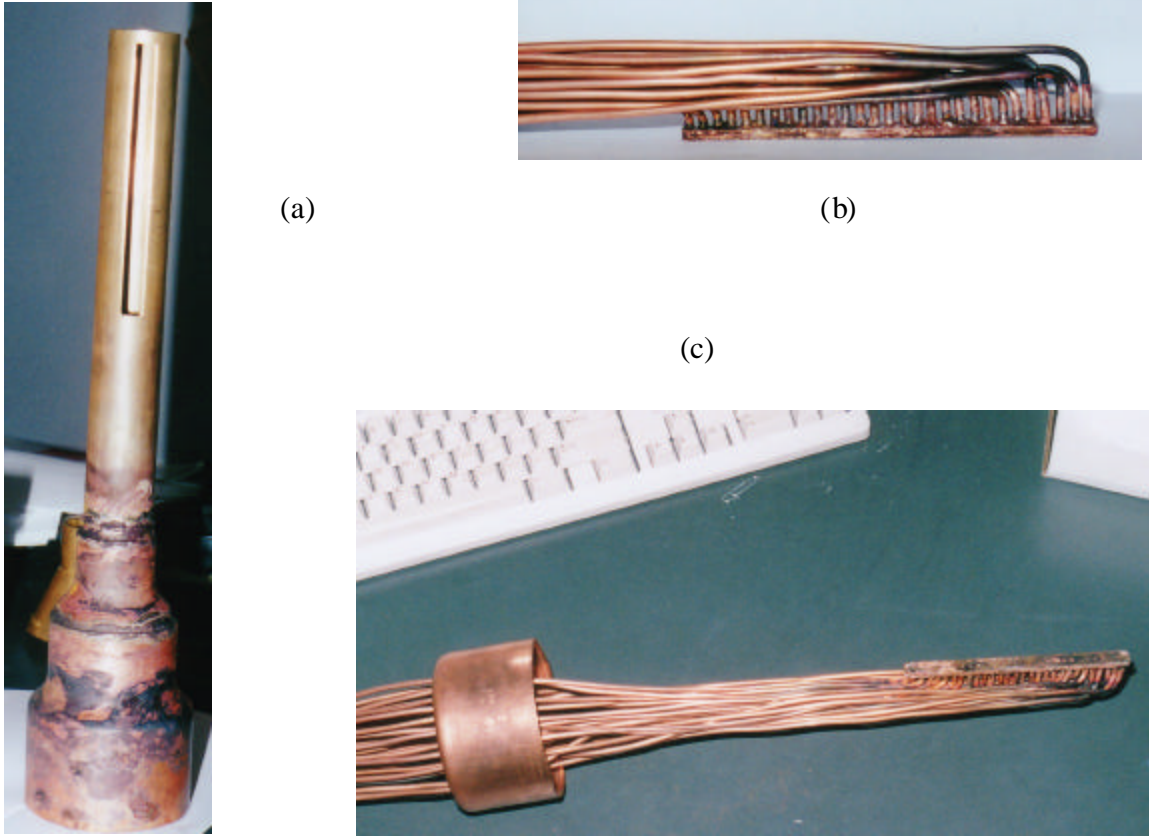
(a) Distributor header during assembly (b) Orifice plate with tubes inserted (c) Orifice plate with tubes fed through and brazed to endcap
